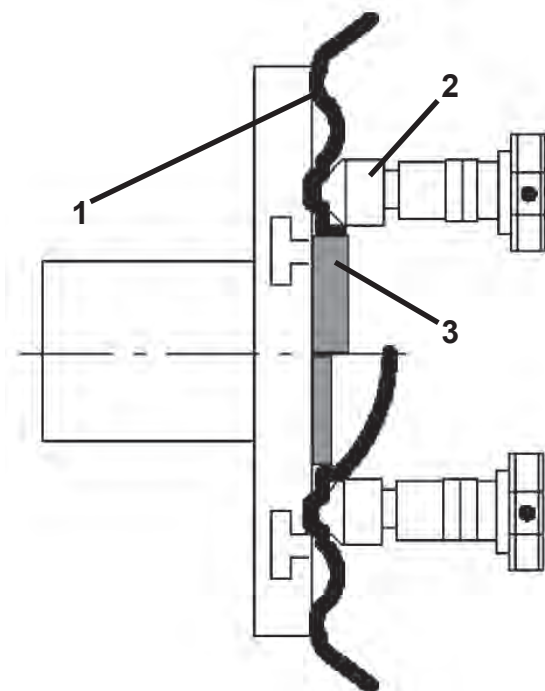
Clamping adaptor to clamp centre bore located car wheels
